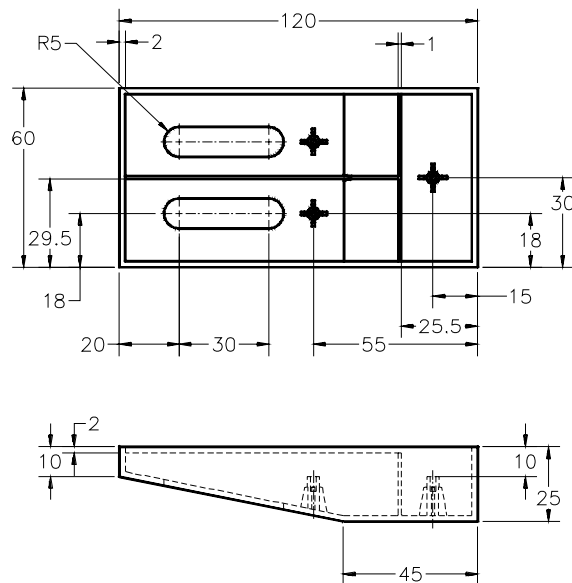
Dimensions of the model for Tutorial 1, with the fillets removed for clarity
